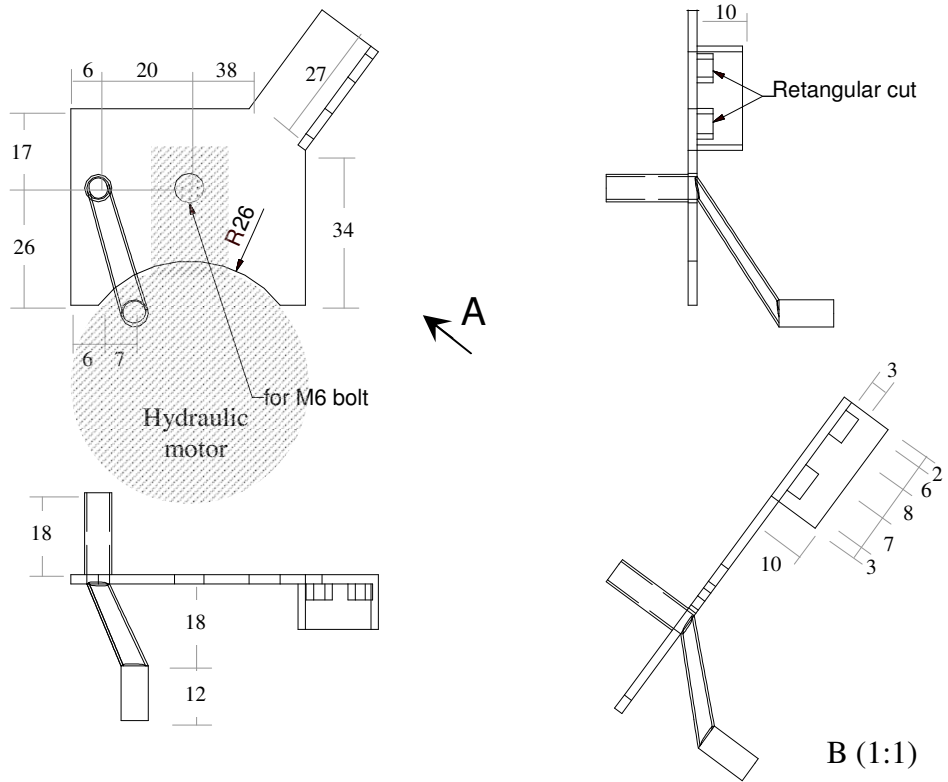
Schematic of feeder used in DM installer B and C (all dimensions in mm).
